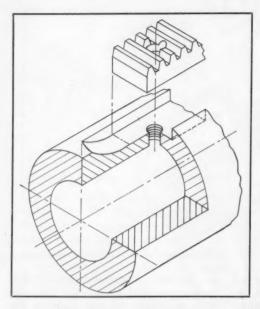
This sketch shows a heavier design of sleeve and rack, the wall thickness of the sleeve being sufficient for a deep slot to be cut.
